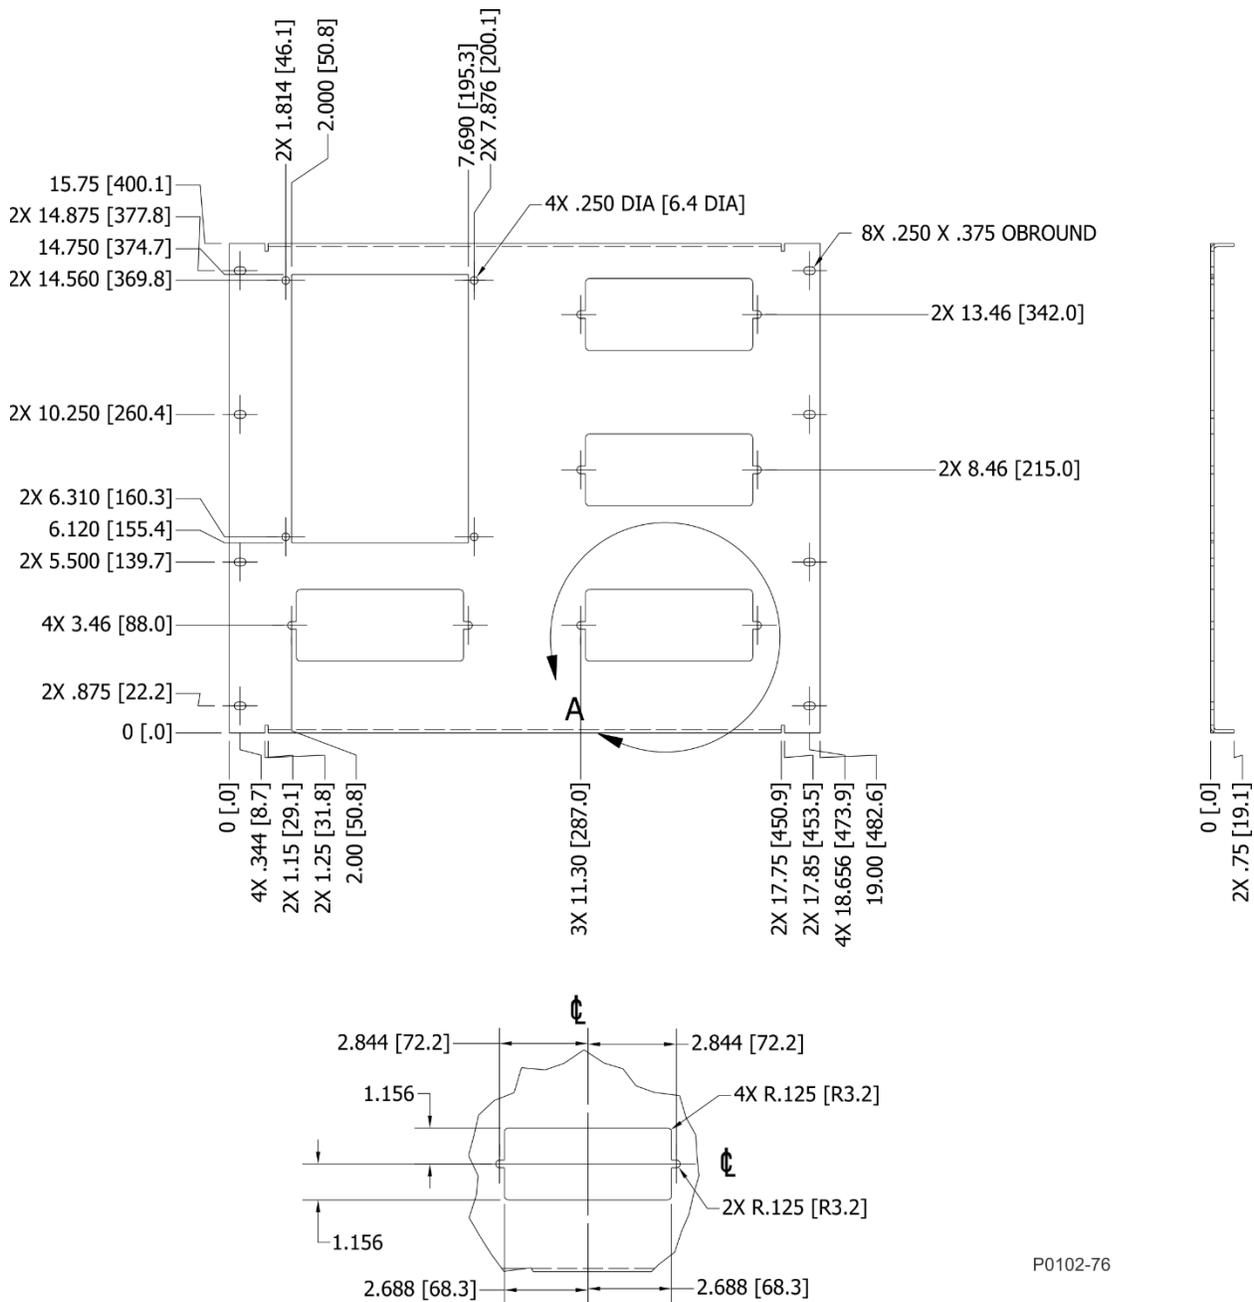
19-Inch Rack Adapter Plate with Four FT Test Switches (Basler P/N: 9424227002)
